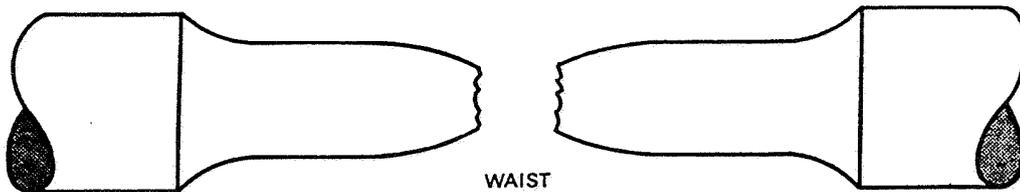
FRACTURED TEST PIECE SHOWING WAISTING
